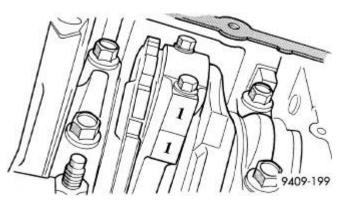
Mark On Connecting Rod & Bearing Cap Courtesy of CHRYSLER GROUP, LLC
